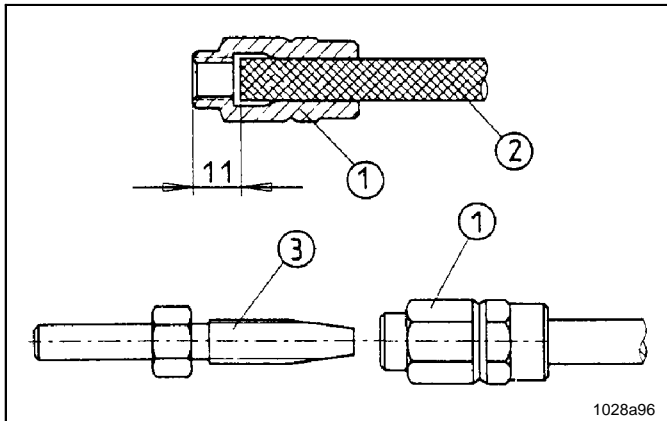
Preassembly of the threaded sleeves and hose studs on the high pressure hose
